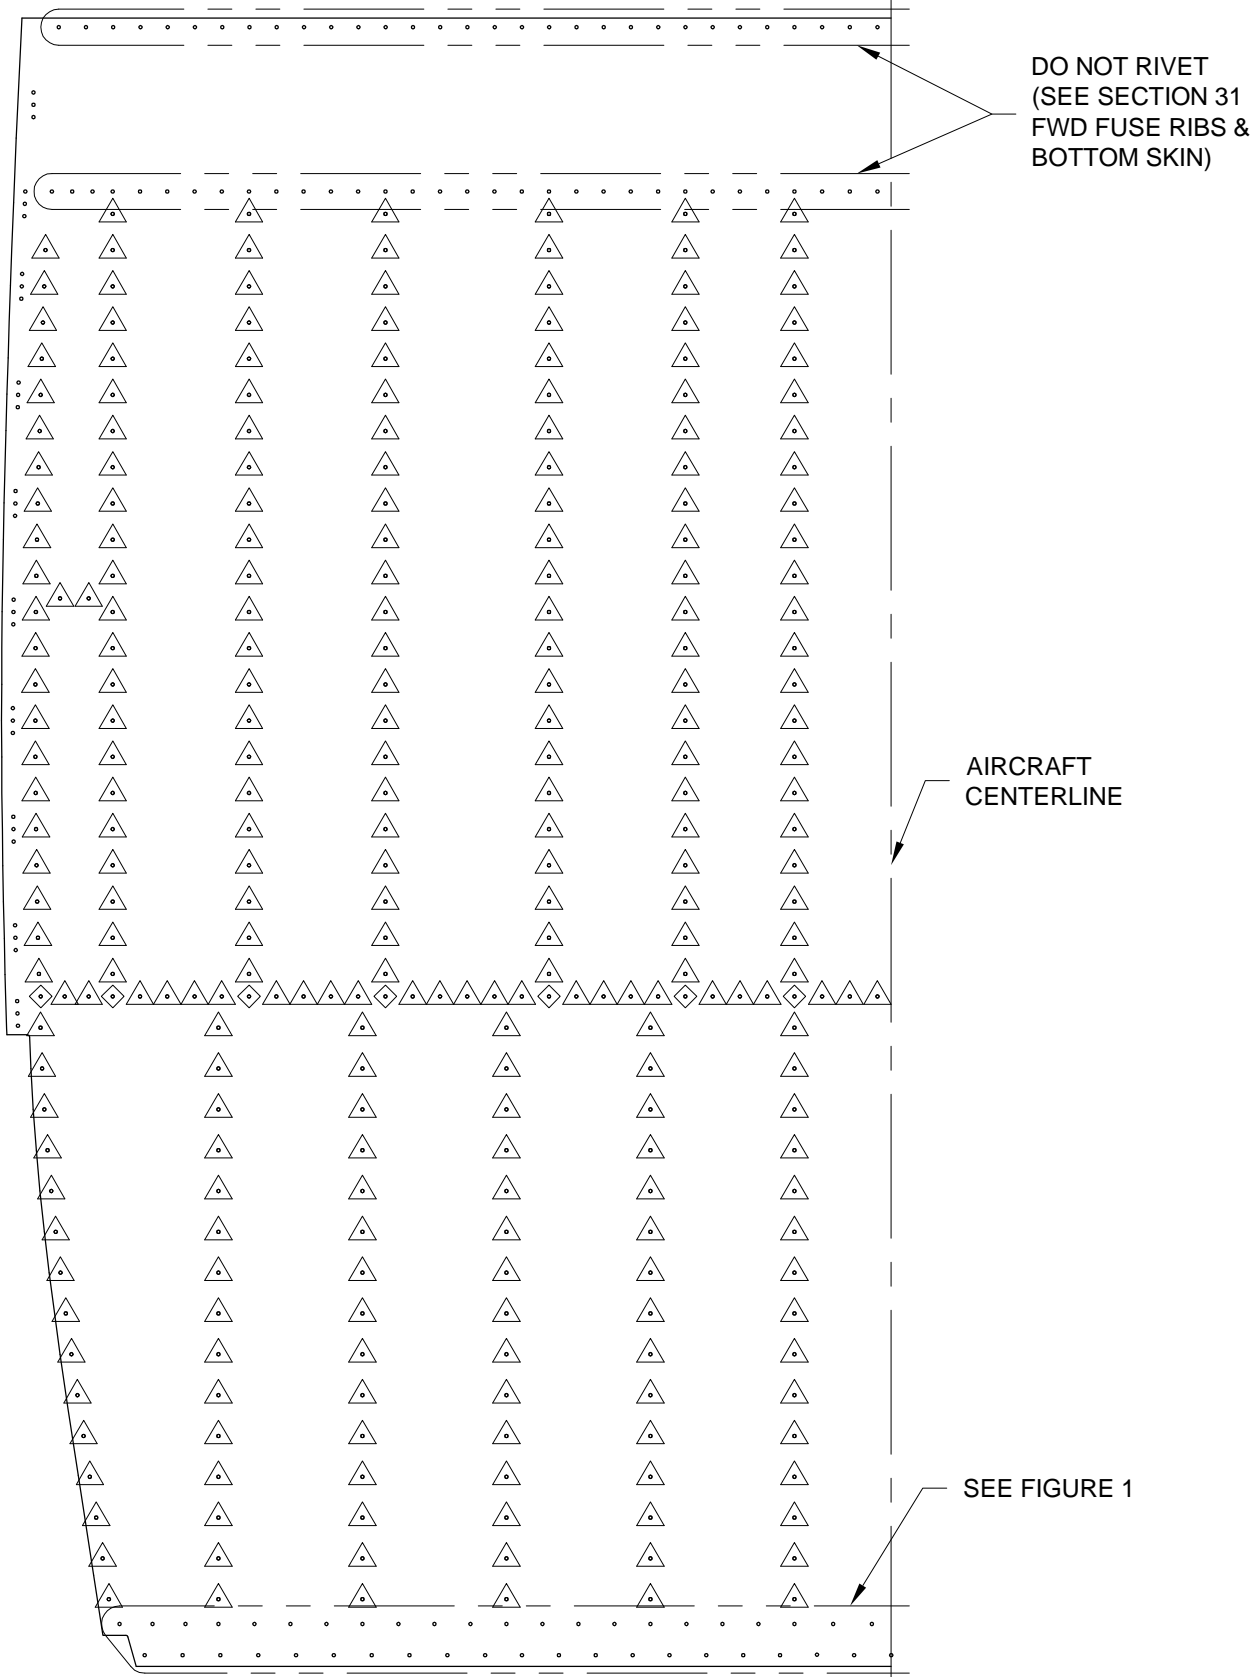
CENTER BOTTOM SKIN RIVET CALLOUTS
